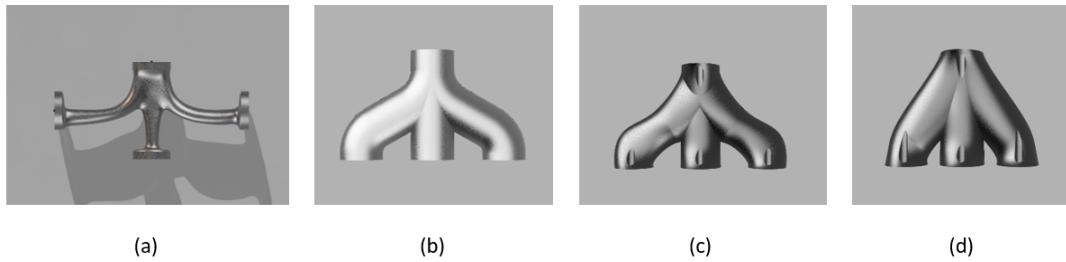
Manifold Design 4 (a) Rear View (b) Front view
